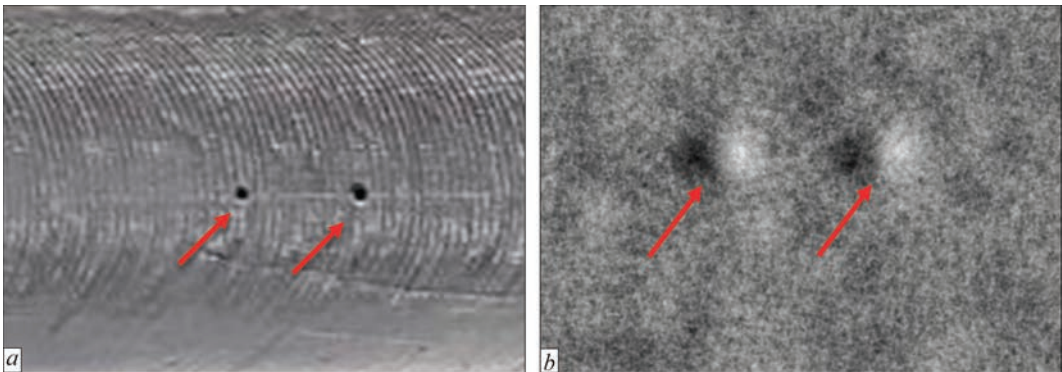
Shearography inspection of the test area of a weld of an aluminium specimen: general view of the area with defects (a) and typical pattern of detected defects with a diameter of $d = 0.3$ mm and a depth of $L = 1.8$ and 1.5 mm (b)
